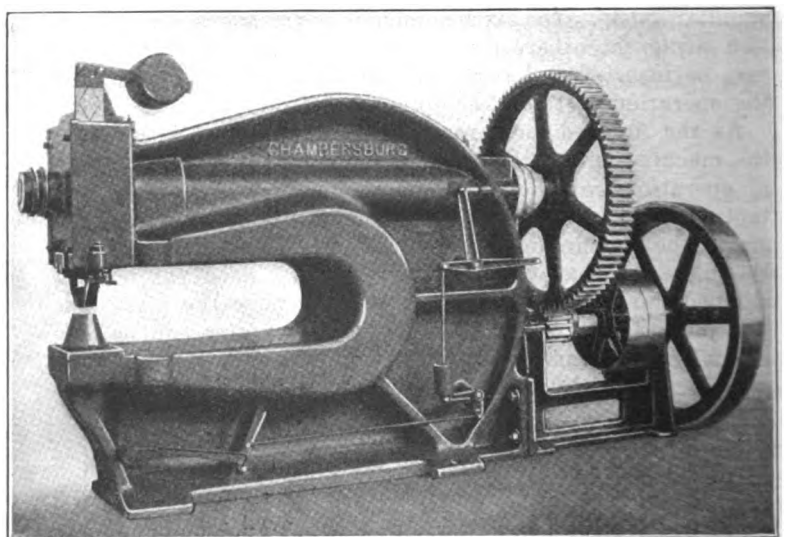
CHAMBERSBURG MECHANICAL CONTROL PUNCHING MACHINE
